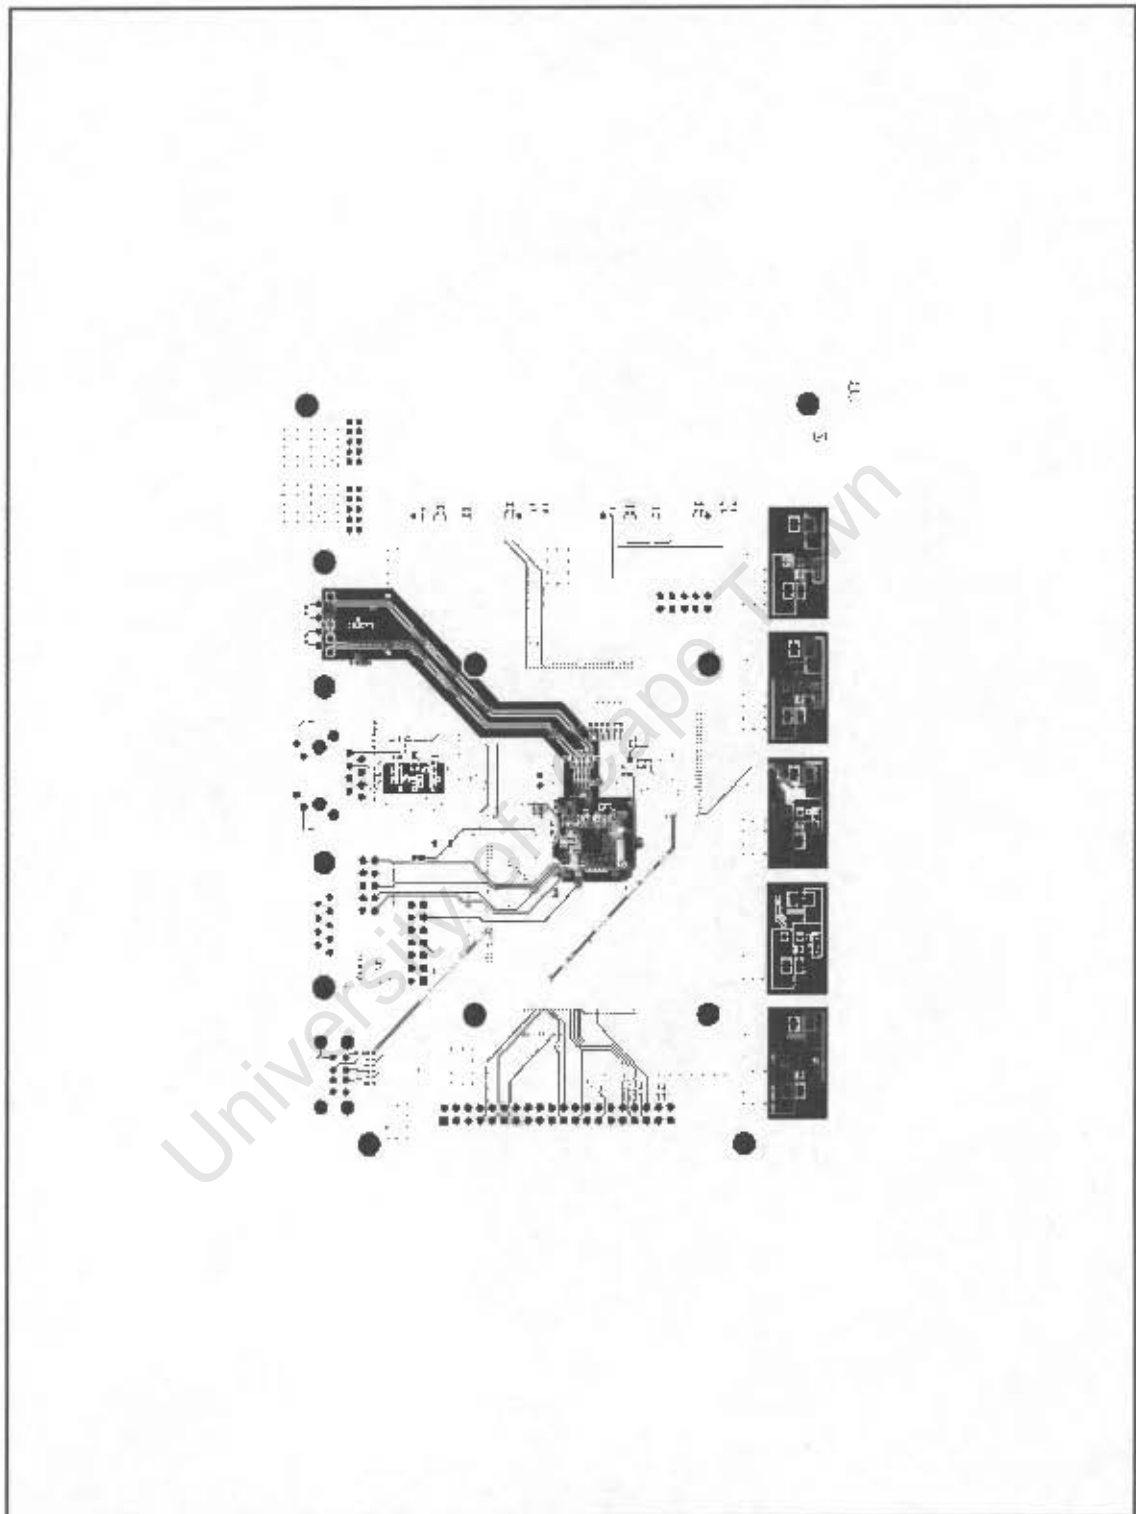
RUI Motherboard PCB Layout - Bottom Signal Layer
